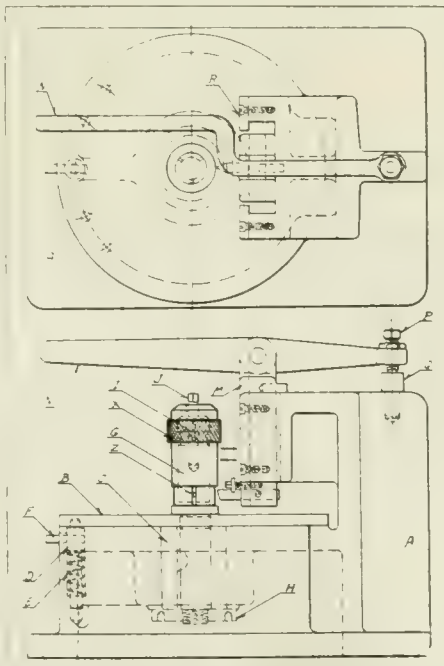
FIXTURE FOR CUTTING INDICATING LINES.
